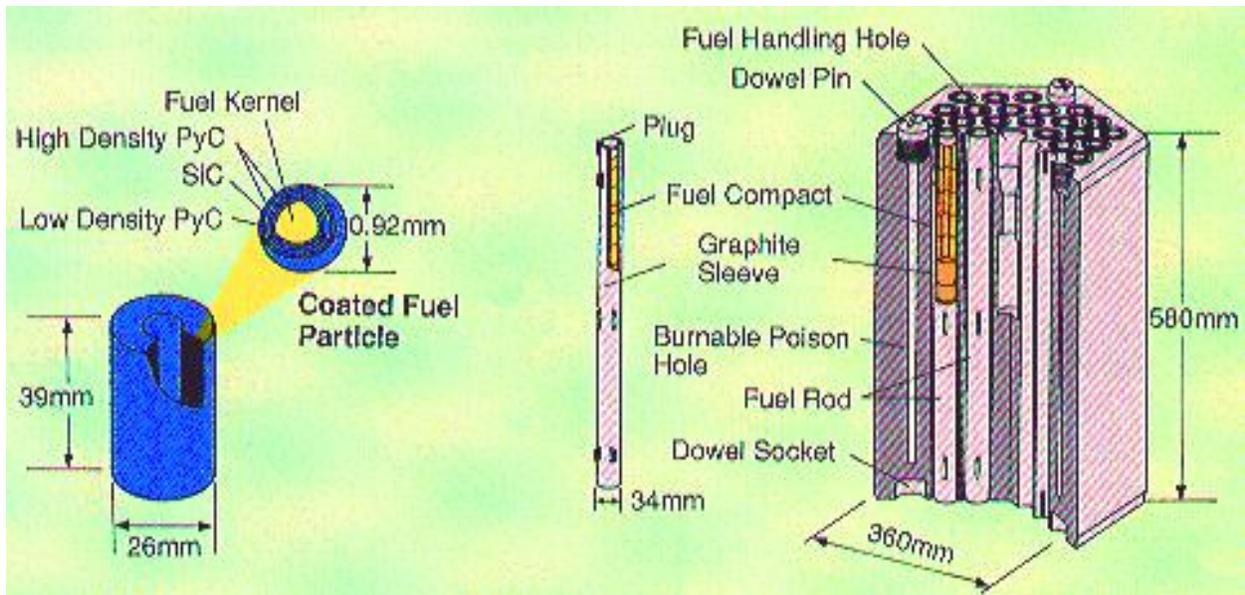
Prismatic graphite fuel assembly in the HTTR.
